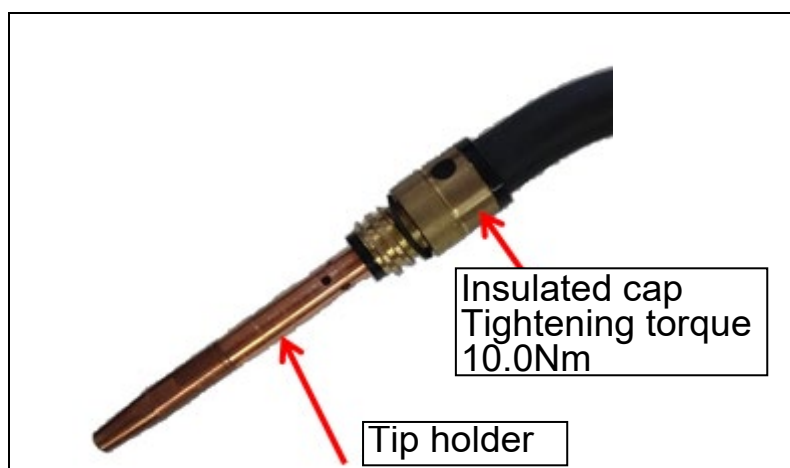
(b) Removing the insulated cap and the tip holder
